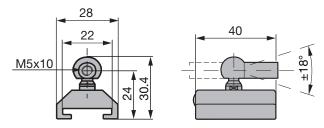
Installation dimensions of BTL5-F-2814-1S magnet
